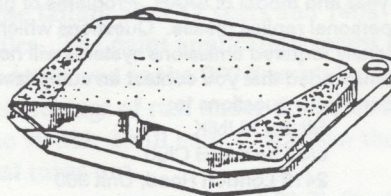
Chamfered DM 121 brake pads are now available for cases of short brake pad life.
